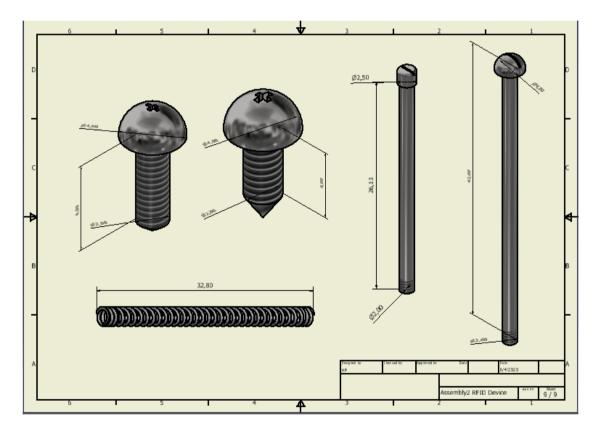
Isometric drawing of the connectors and spring coil used in this RFID Device with its full dimensions.
